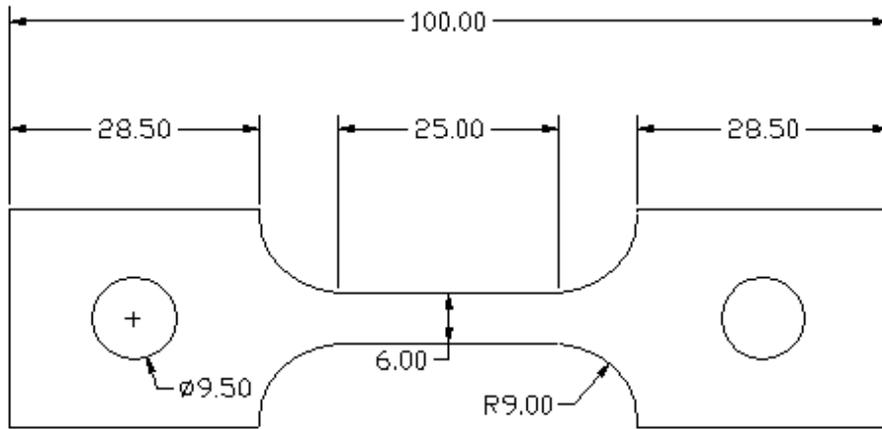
TMF test specimen profile for unwelded and welded conditions
